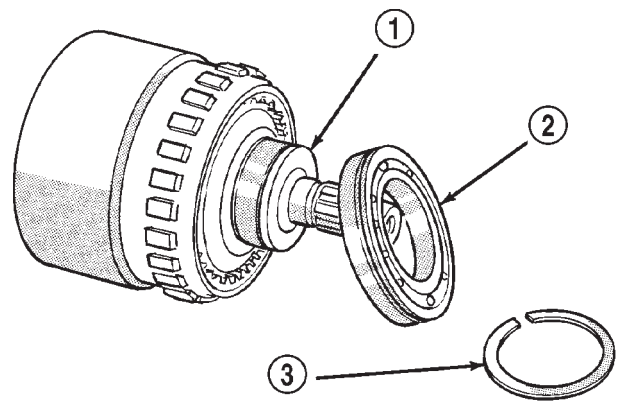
Removing Gear Case From Geartrain Assembly
